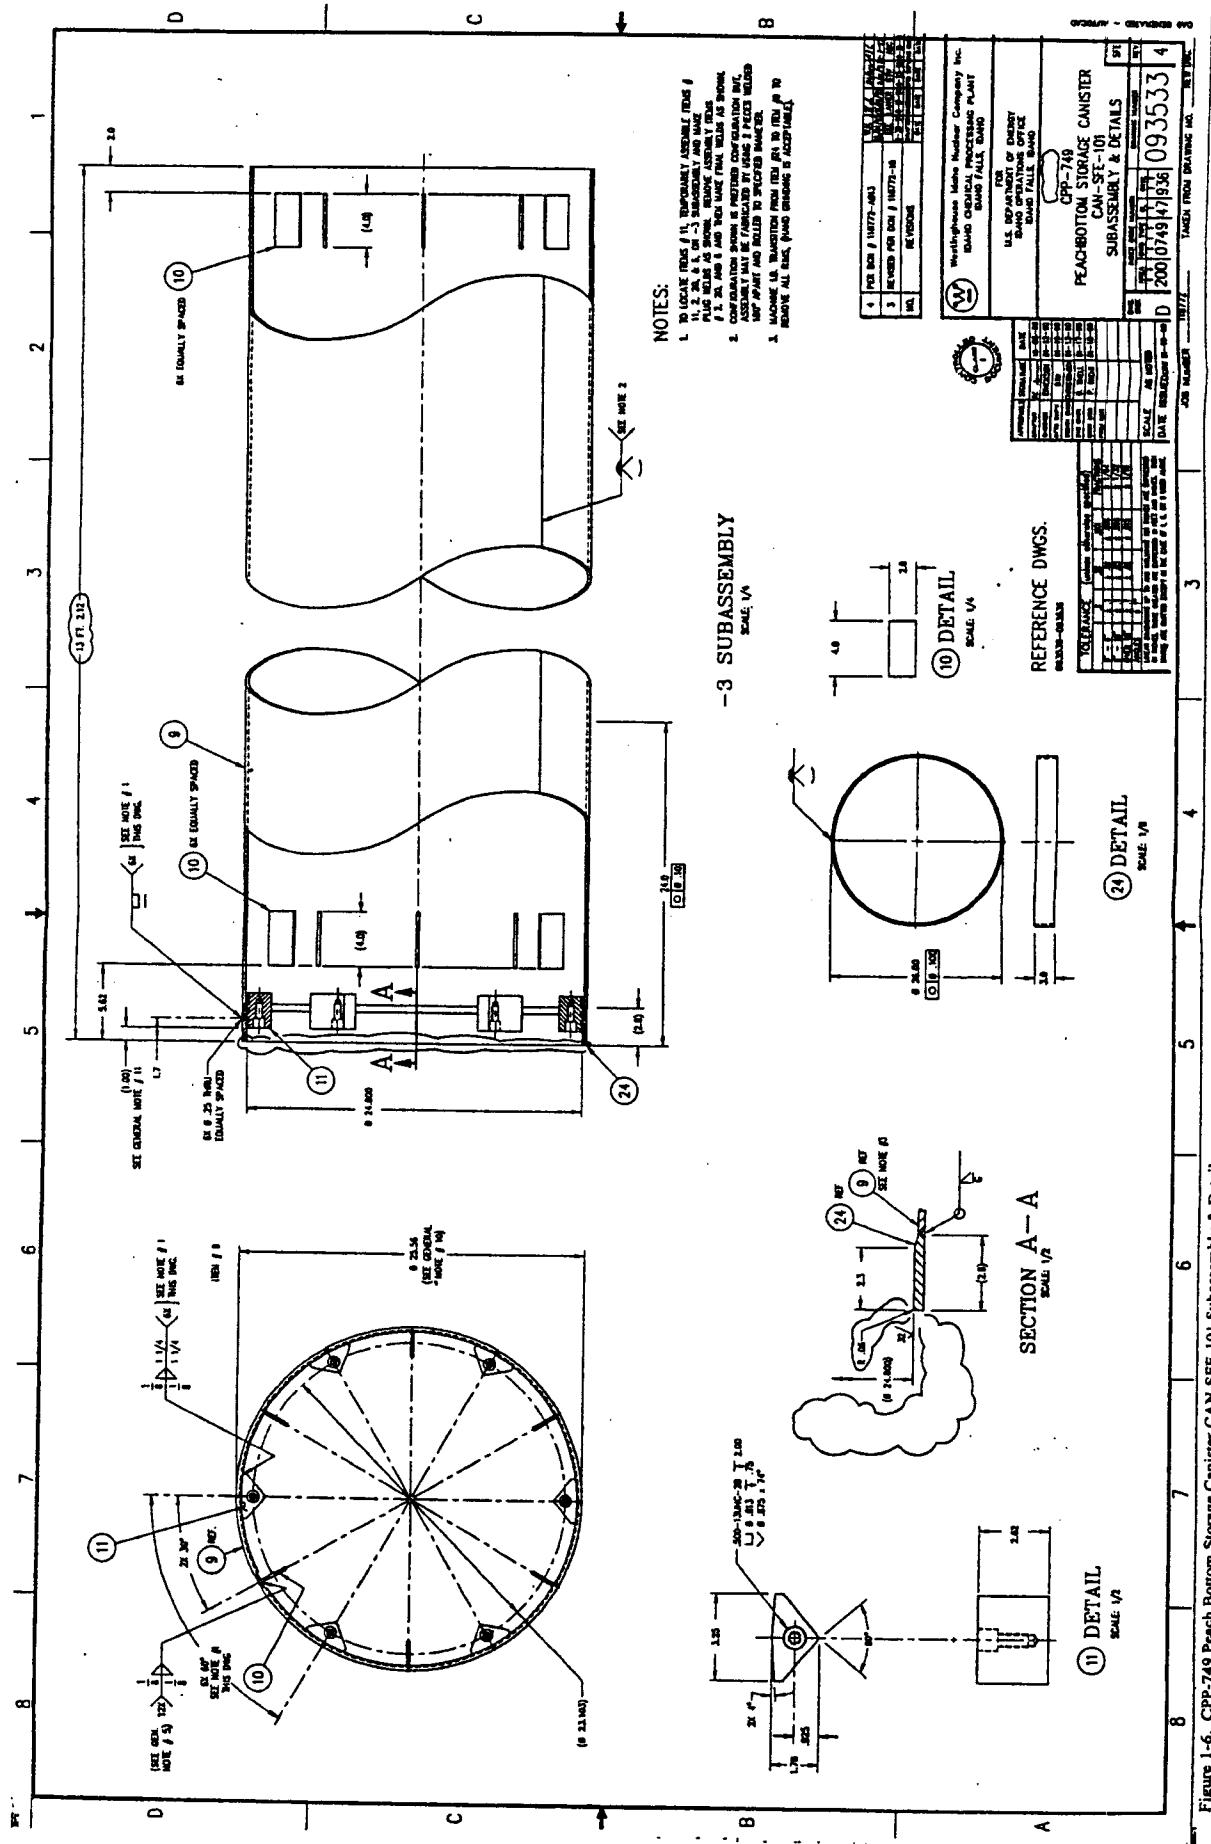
CPP-749 Peach Bottom Storage Canister CAN-SFE-101 Subassembly & Details
